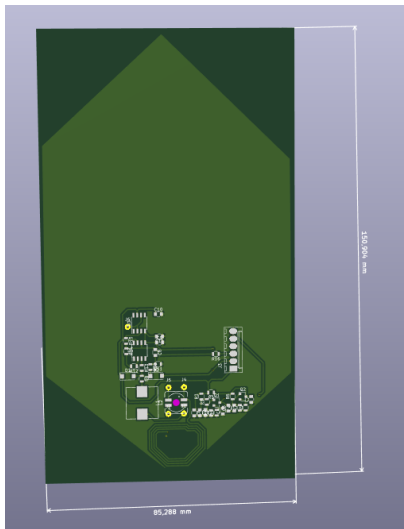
Design of complete PCB for the single electrode - hidden electronics
